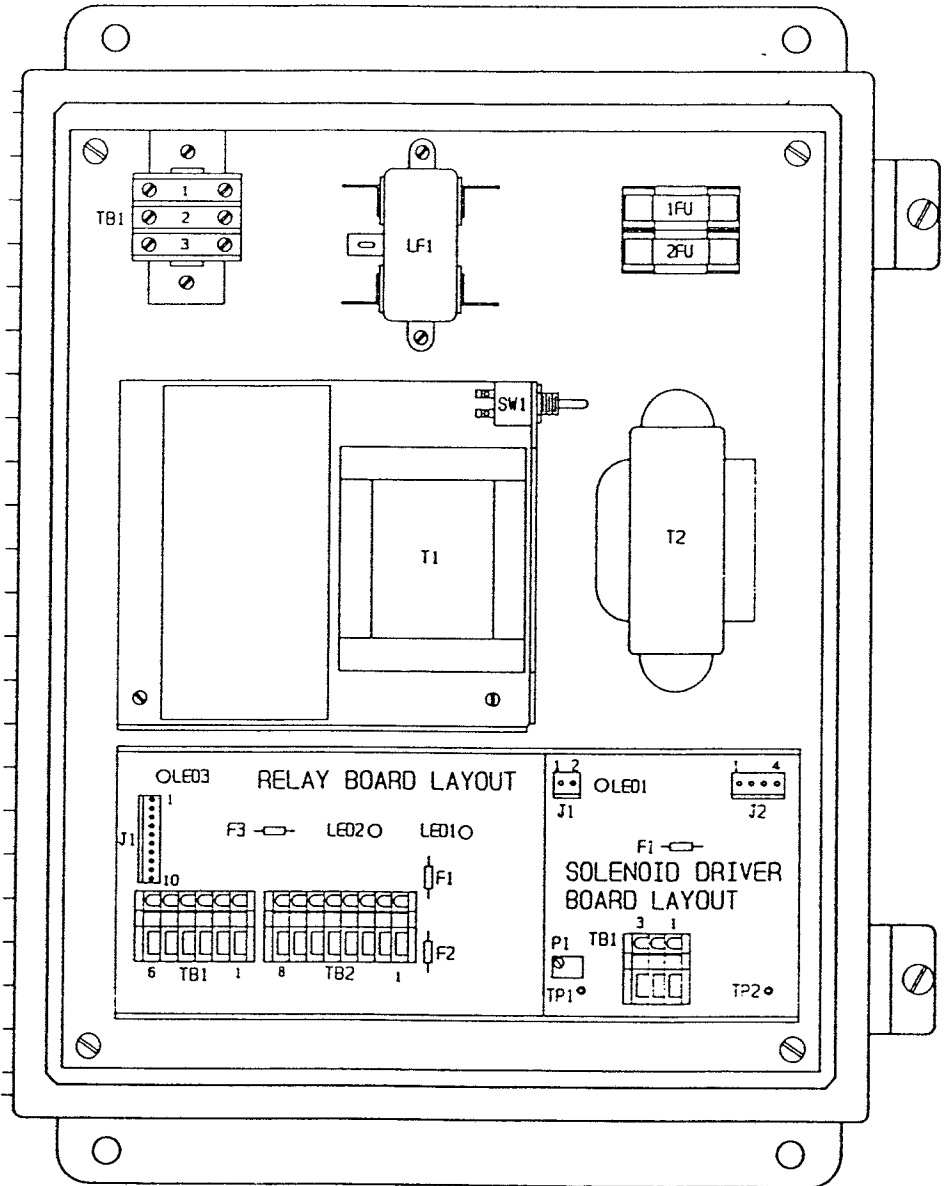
Layout for Main Chassis, Relay Board, and Solenoid Driver Board
